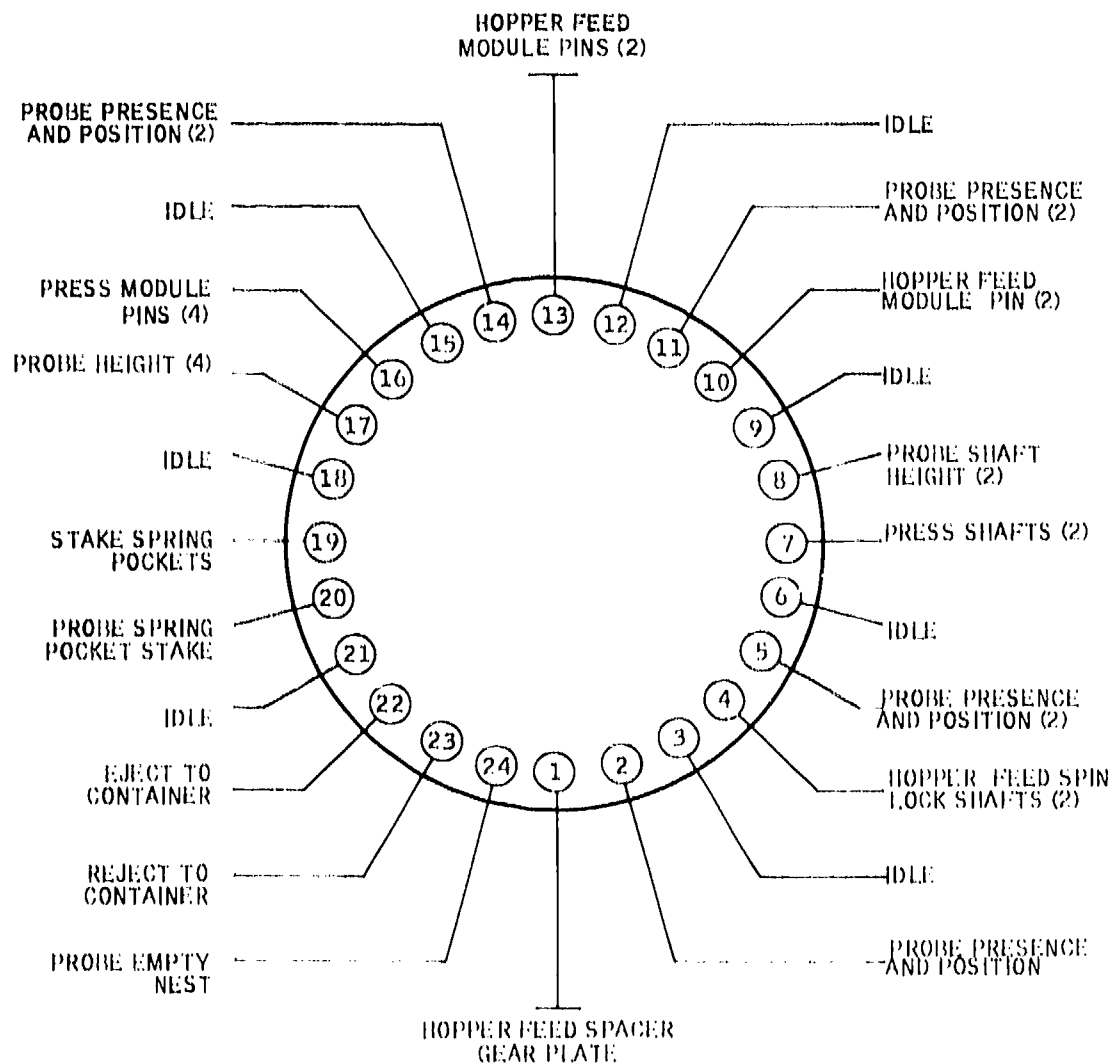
Dial schematic, machine S1 - S&A module lower sub-assembly operation 1
